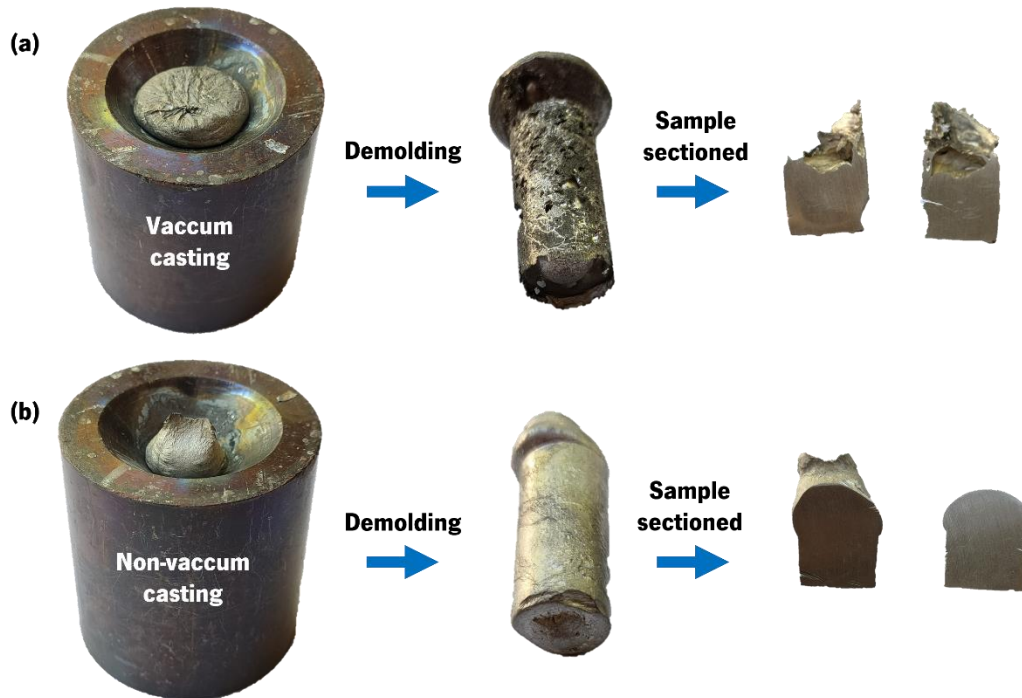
Magnesium investment casting in metallic molding: (a) vacuum casting and (b) non-vacuum casting.
